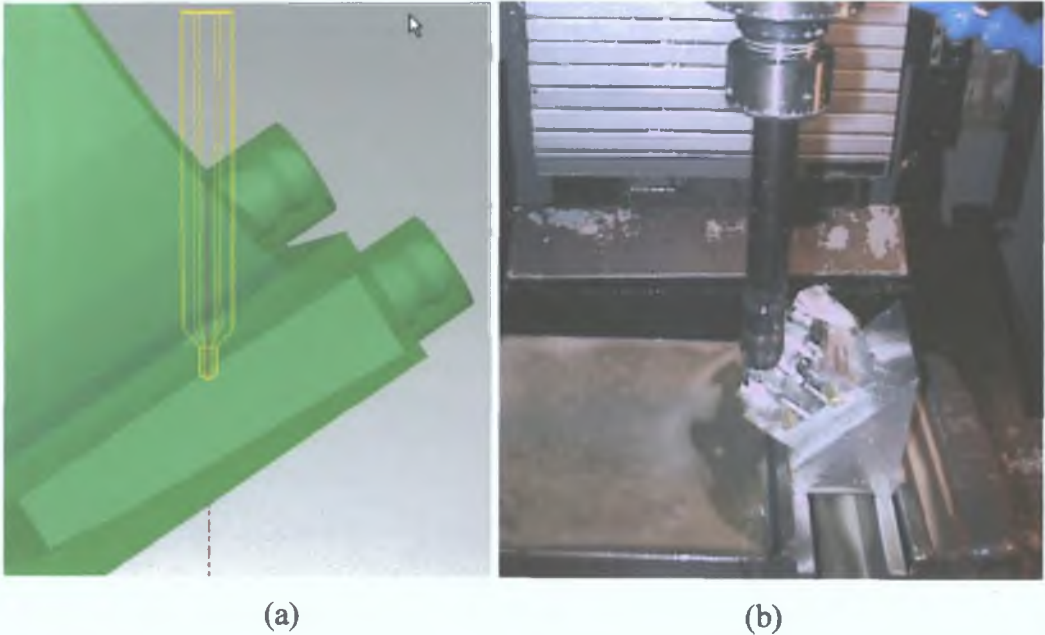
Centredrill Sequence. (a) ProEngineer Tool Path. (b) Machined Work Piece.
